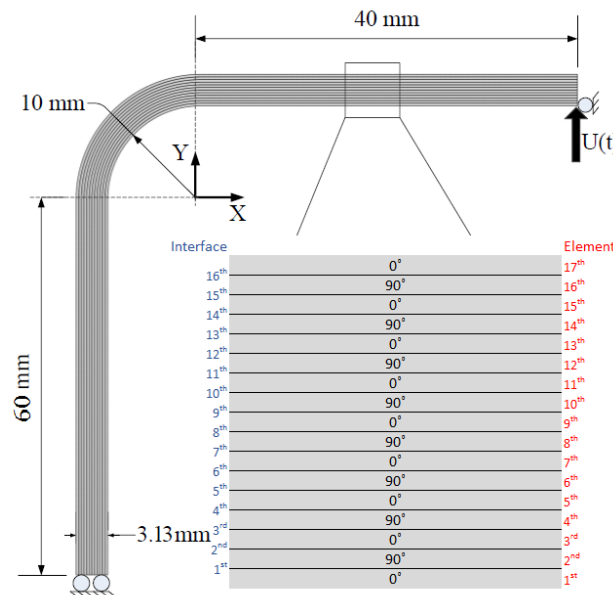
(a) Geometry and dimensions of the manufactured laminate [2] (b) L bracket test setup [2]
